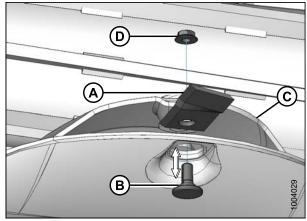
Nut, Shoulder Bolt, and Cutter Blade
